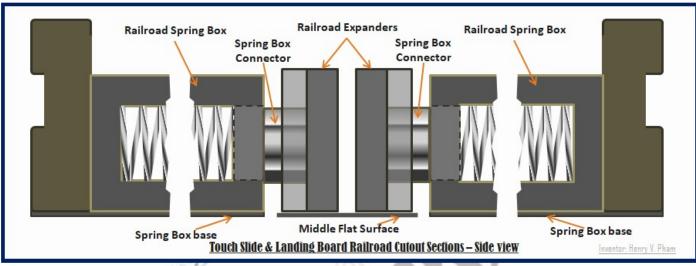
Touch-Slide & Landing Board Railroad Cutout section -- Side view
